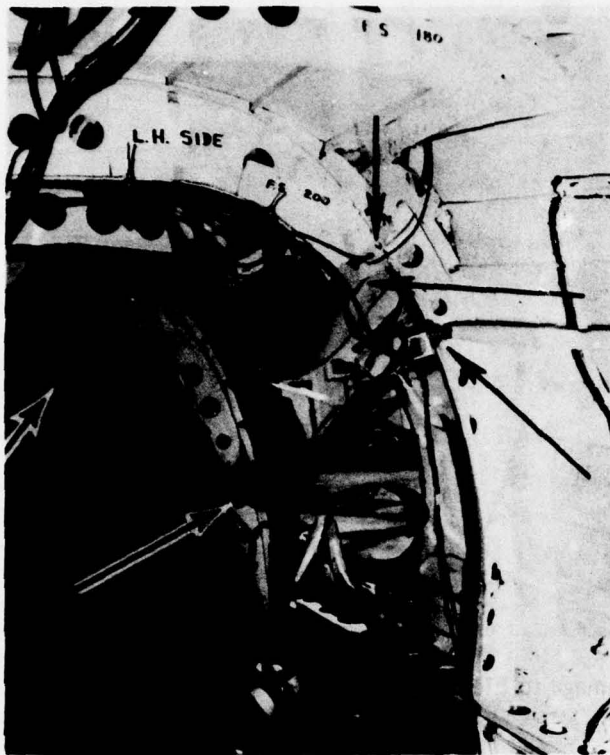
CH-47A Crash Test Damage to Frames, Skins, and Longerons on Left Side Aft of Station 180.
